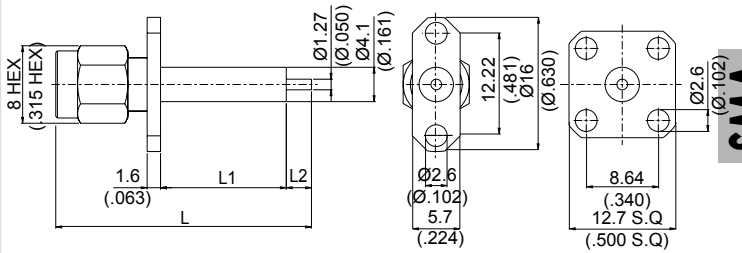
2-hole flange Fig. 2-2:square flange
